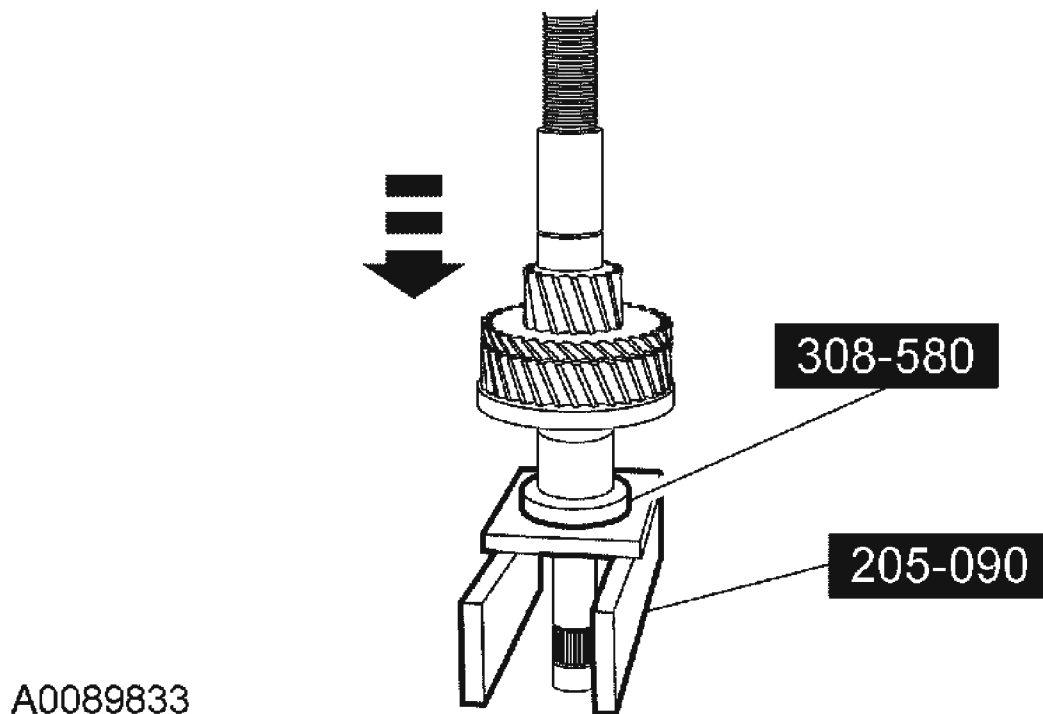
Positioning New 1st And 2nd Gear Synchronizer Assembly On Mainshaft
